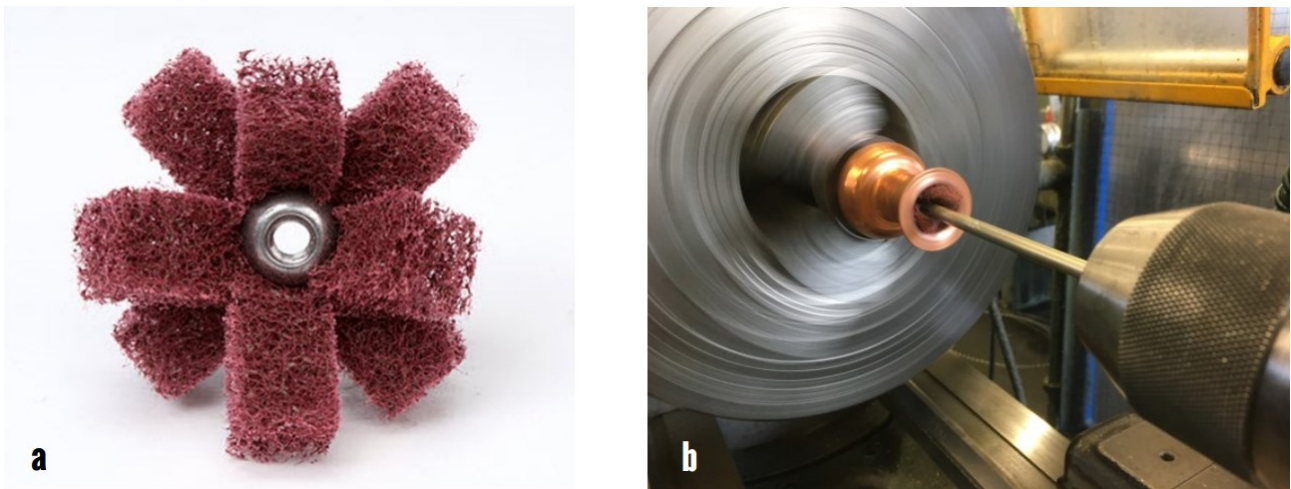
a) Scotch Brite™ cross shaped abrasive. b) Mechanical grinding of the 6 GHz monocell. The cavity is rotating while the operator press with the cross shaped abrasive tool on the internal cavity surface [29]
